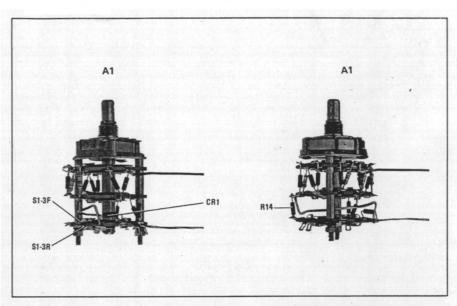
Bandwidth Switch Assembly A1 Component Locations
